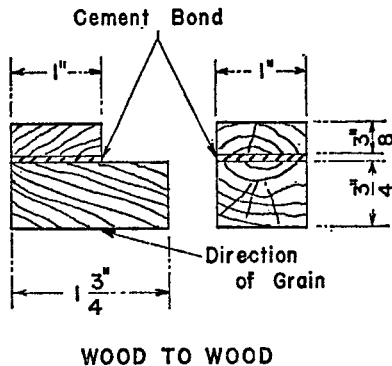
B.—Specimen arrangement for impact strength test (wood-to-wood).
